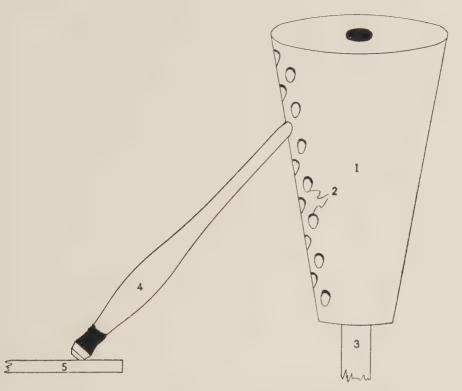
The Jamb Peg For Facet Cutting. 1, jamb peg; 2, holes for insertion of stick; 3, stand rod; 4, dop stick with mounted stone; 5, cutting wheel.
